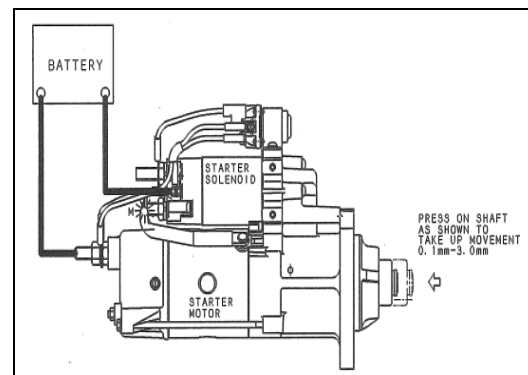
CHECKING OUTPUT SHAFT CLEARANCE (GROUND-FLOAT TYPE)
